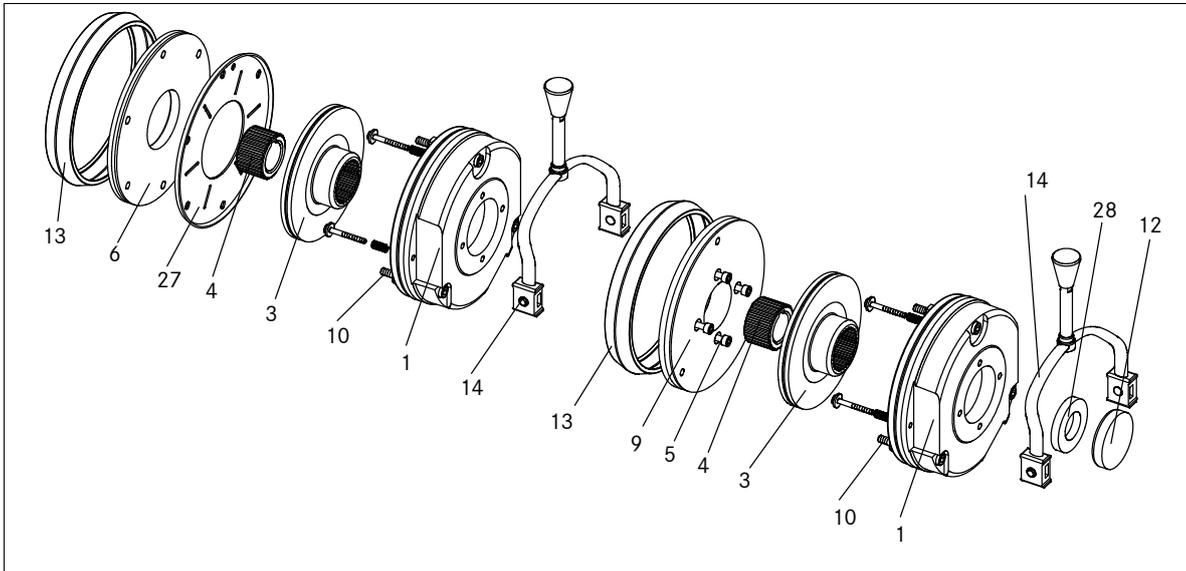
Double spring-operated brake INTORQ BFK458-06 to 25
